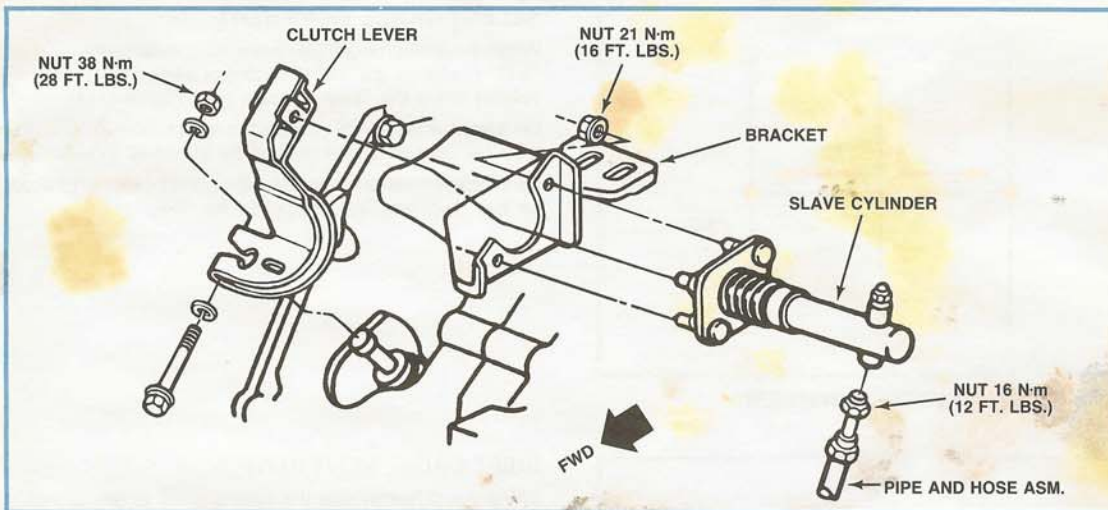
, Clutch Slave Cylinder and Clutch Lever Mounting (P-Body).
